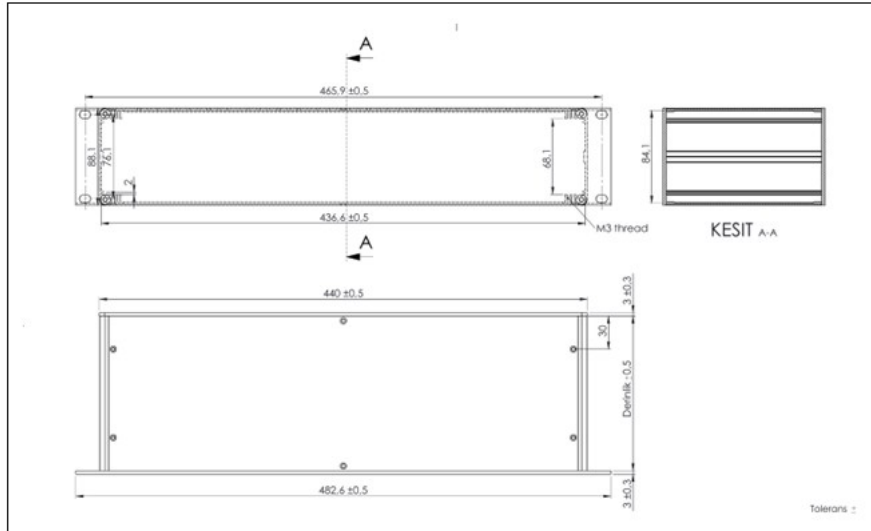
Chassis mechanical technical drawing and dimensioning (19" 2U; dimensions in mm; general tolerance ± 0.5 mm)
